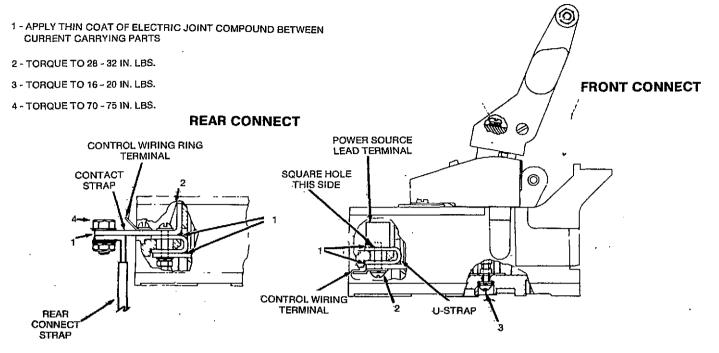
FRONT AND REAR CONNECT SWITCH ASSEMBLY
